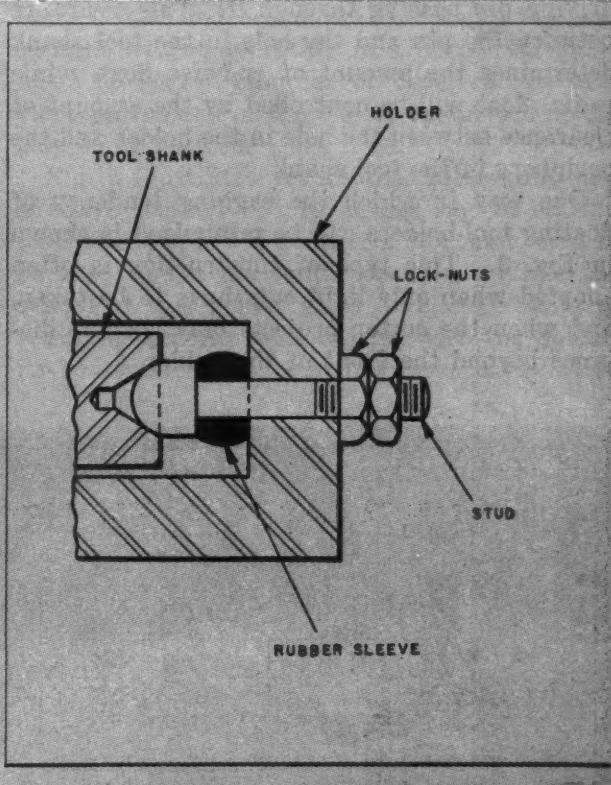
In this floating tool-holder design, pressure of the compressed rubber sleeve keeps the spherical head of the stud in contact with a center in the tool shank and prevents sagging of the shank
